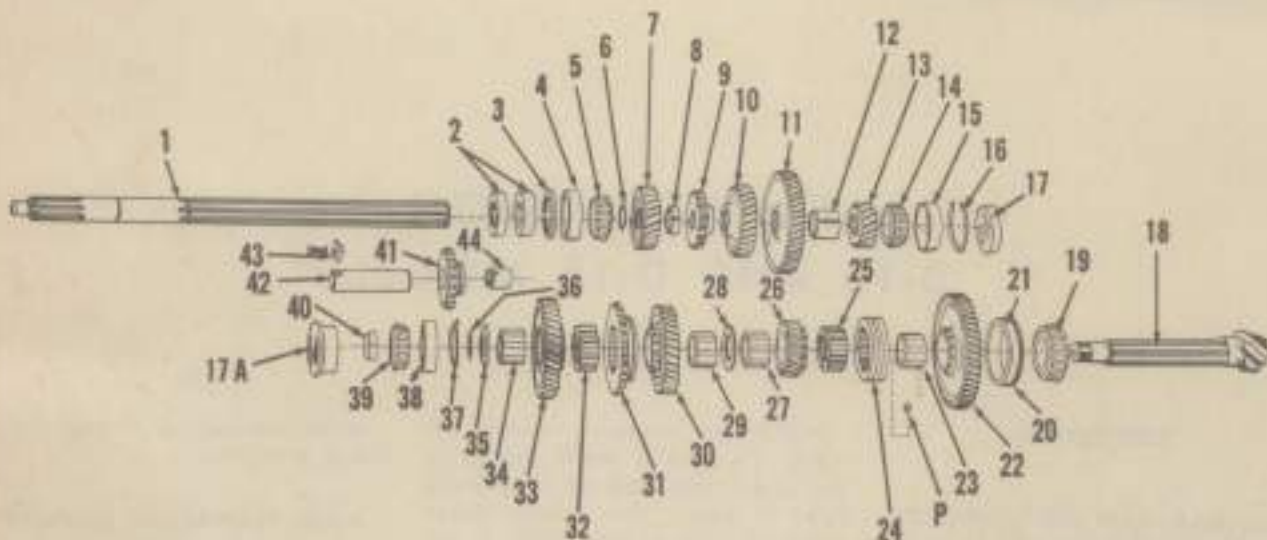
Exploded view of the D-14 and D-15 transmission shafts, gears and related parts. Snap ring (16) controls the end play of the main shaft; snap ring (20) and shims (36) control the pinion shaft end play.
